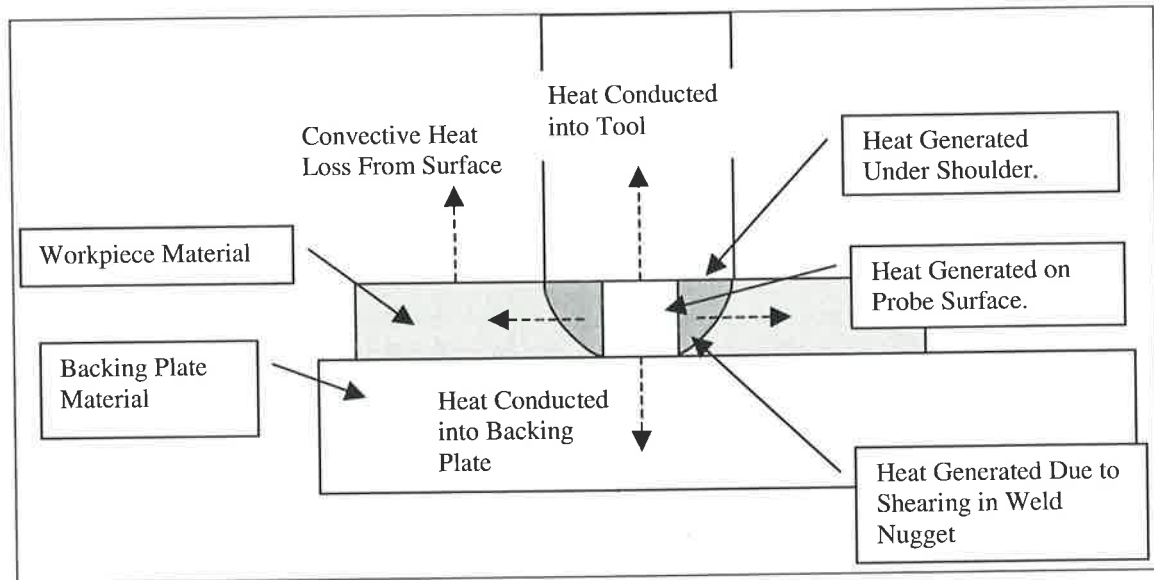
Heat Flows that Occur During Friction Stir Welding
